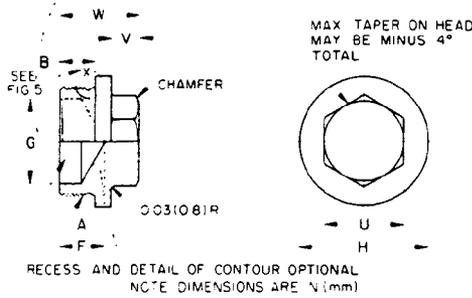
Hexagon Inside Head Plug (420109C)
